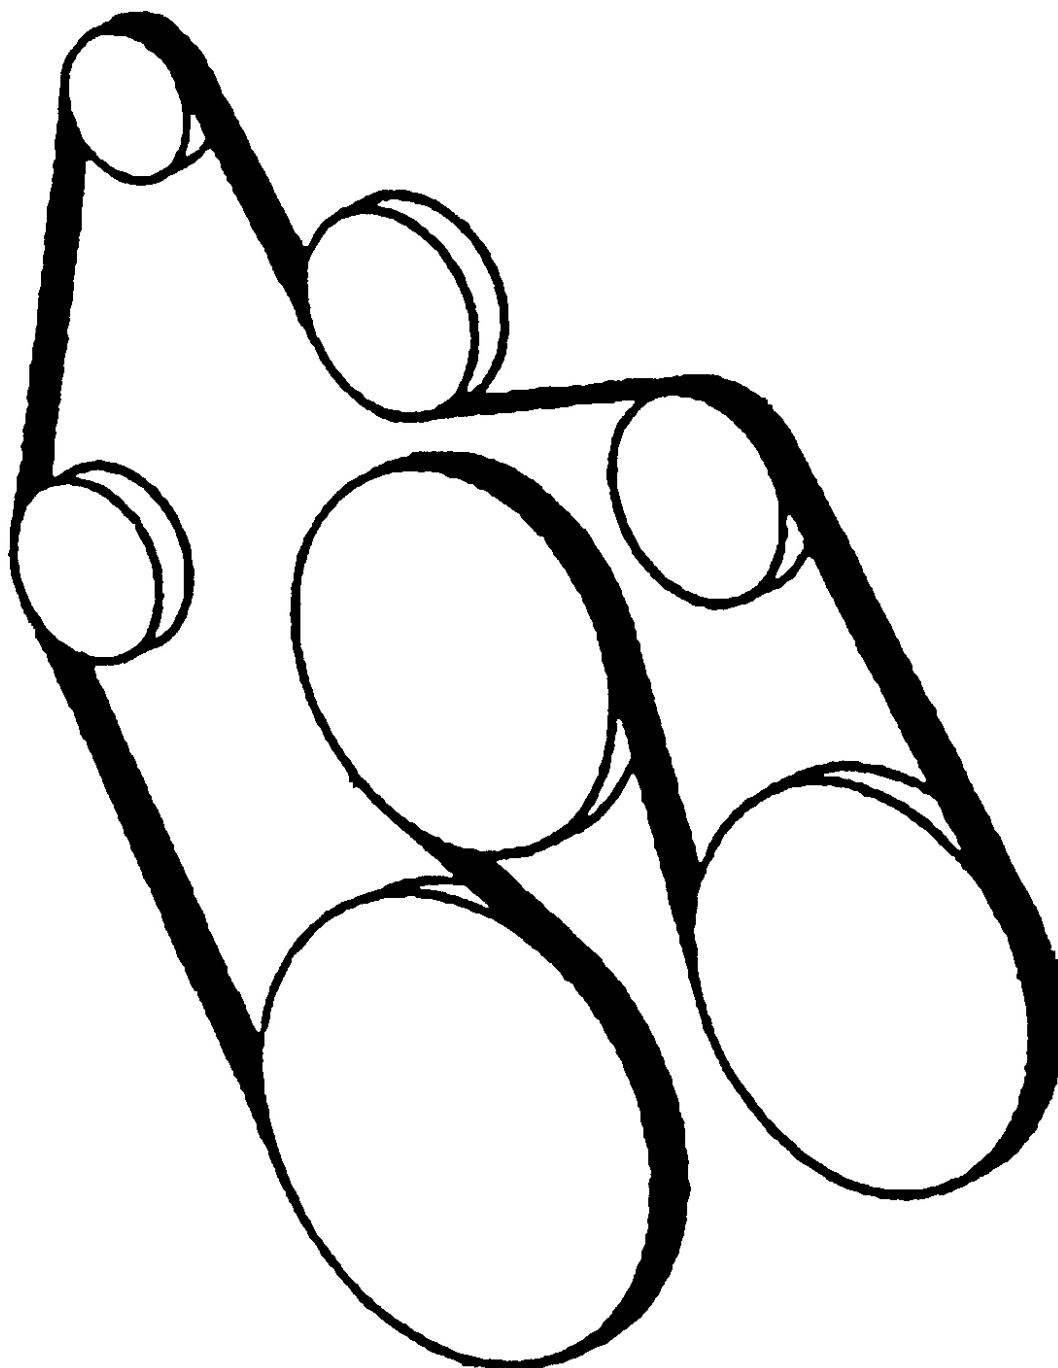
Drive Belt Routing - 2.2L (Without A/C, With Manual Steering)
